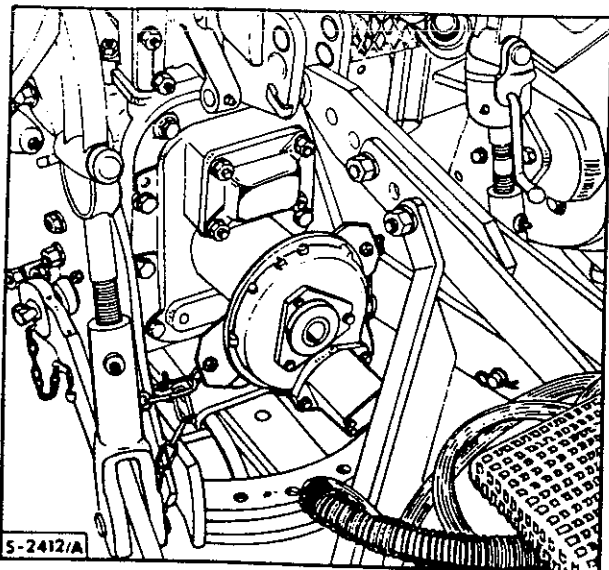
Attaching Gearbox and PTO Pump on P.T.O. shaft.
